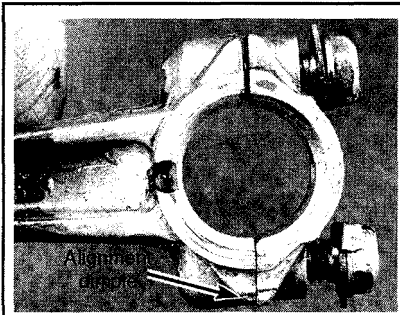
but if not, be sure to matchmark the caps before removal and align them during assembly
